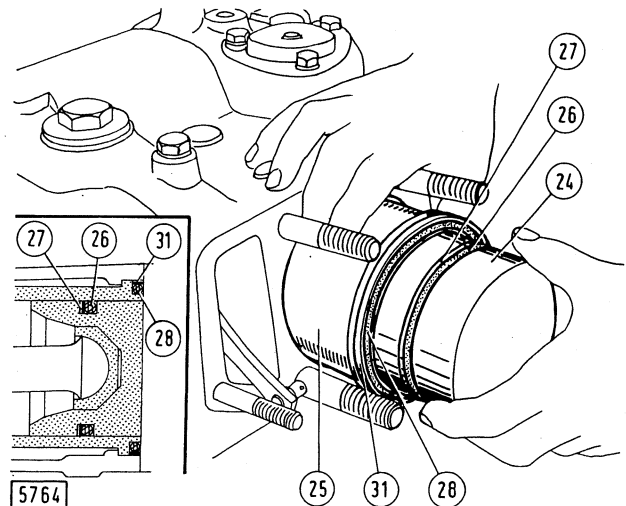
Removing the hydraulic lift piston and cylinder barrel.
